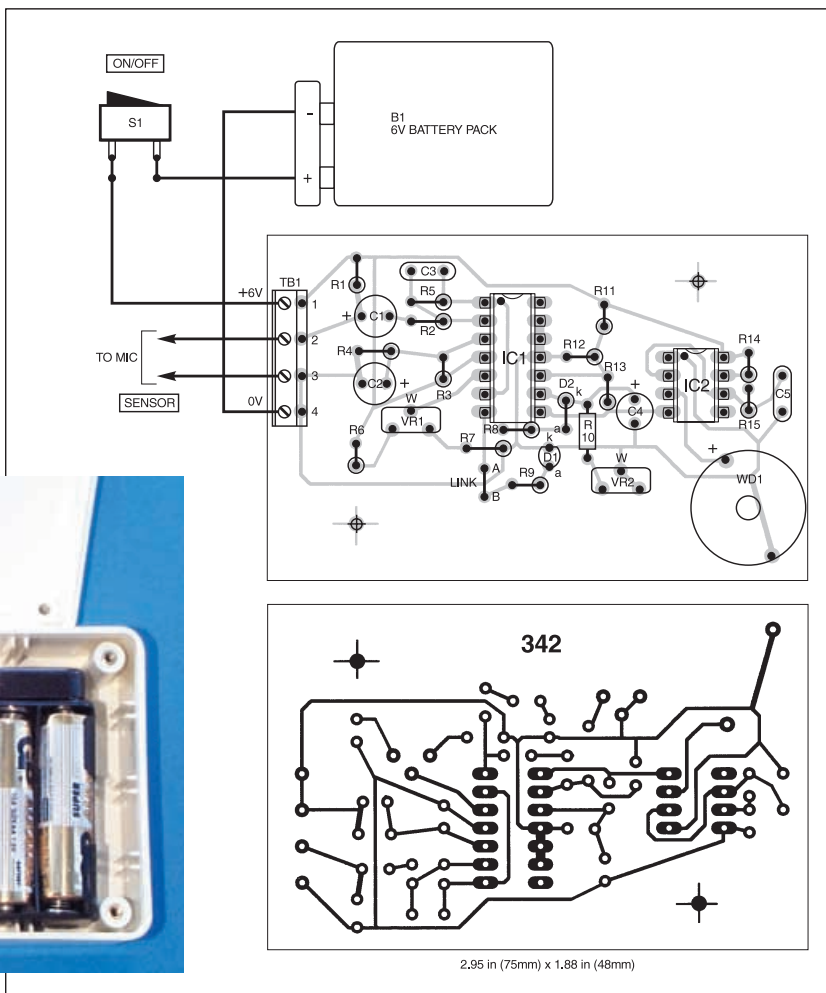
Printed circuit board component layout, full-size copper foil master and wiring to off-board components.
